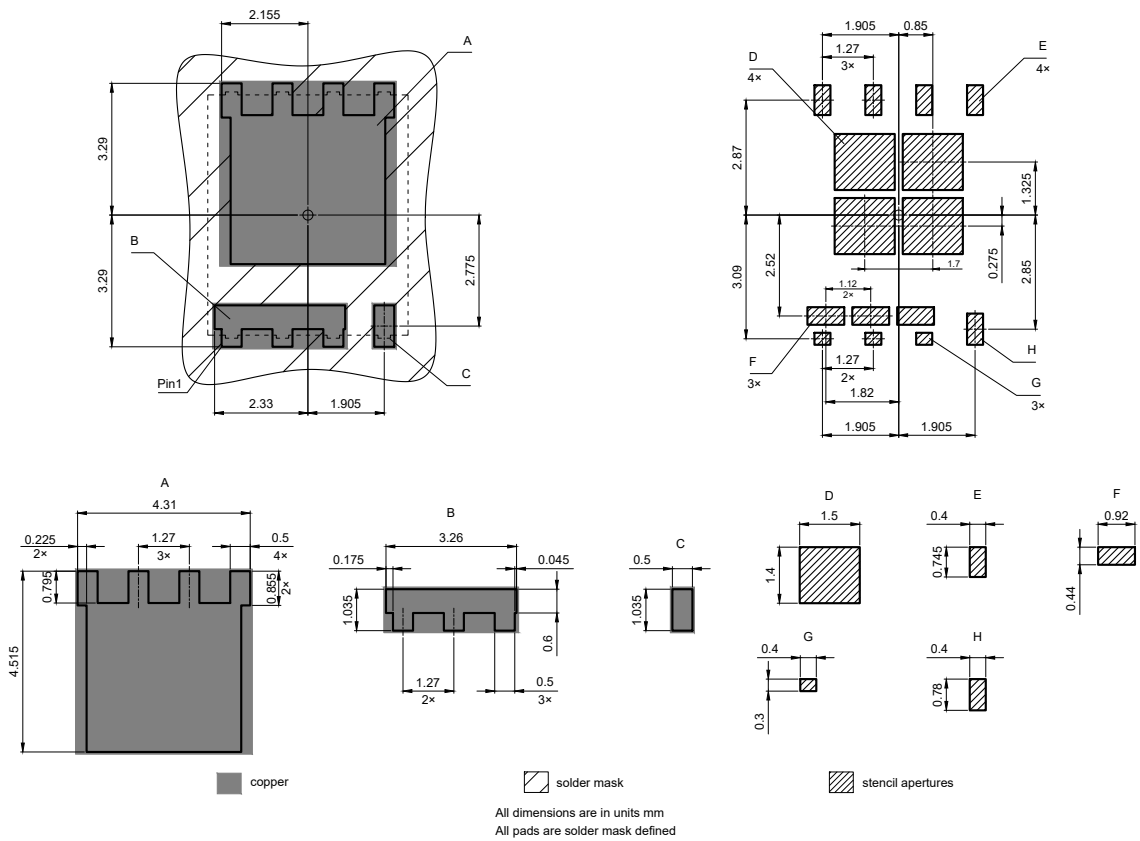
Footprint drawing PG-TDSON-8, dimensions in mm
